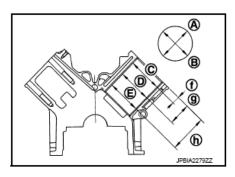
Identifying Piston-To-Cylinder Bore Clearances Courtesy of NISSAN NORTH AMERICA, INC.
